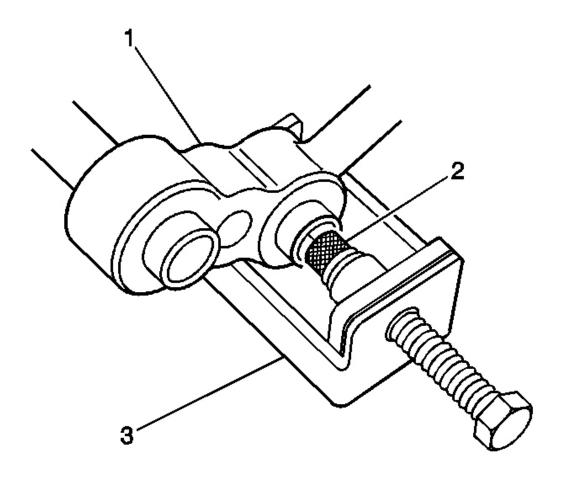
Identifying Proper Placement Of J 44551-5 Courtesy of GENERAL MOTORS CORP.
